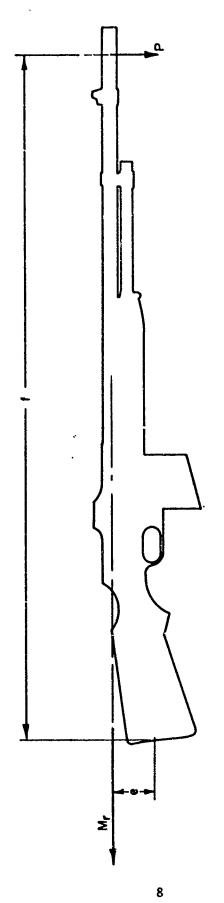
Showing Certain Dimensions of Browning Machine Rifle.
